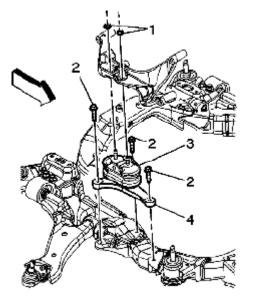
Identifying Mount And Lower Bracket Courtesy of SUZUKI OF AMERICA CORP.
